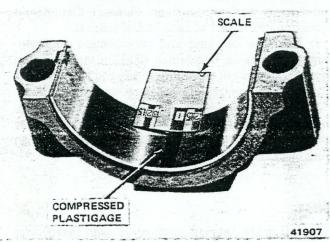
B-81 Rod Bearing Clearance Measurement with Plastigage
